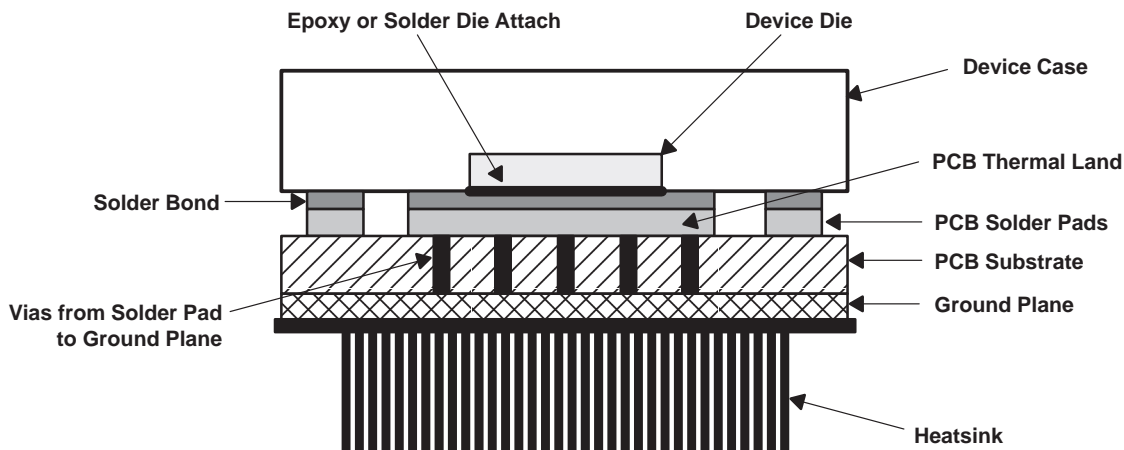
Typical Cross-Sectional View of a Surface-Mount Power Device and Thermal Transfer System
